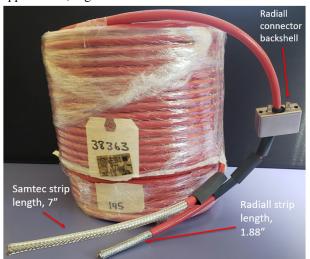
Cable with jacket stripped back at both ends. Heat shrink and Radiall connector backshell are in place.
